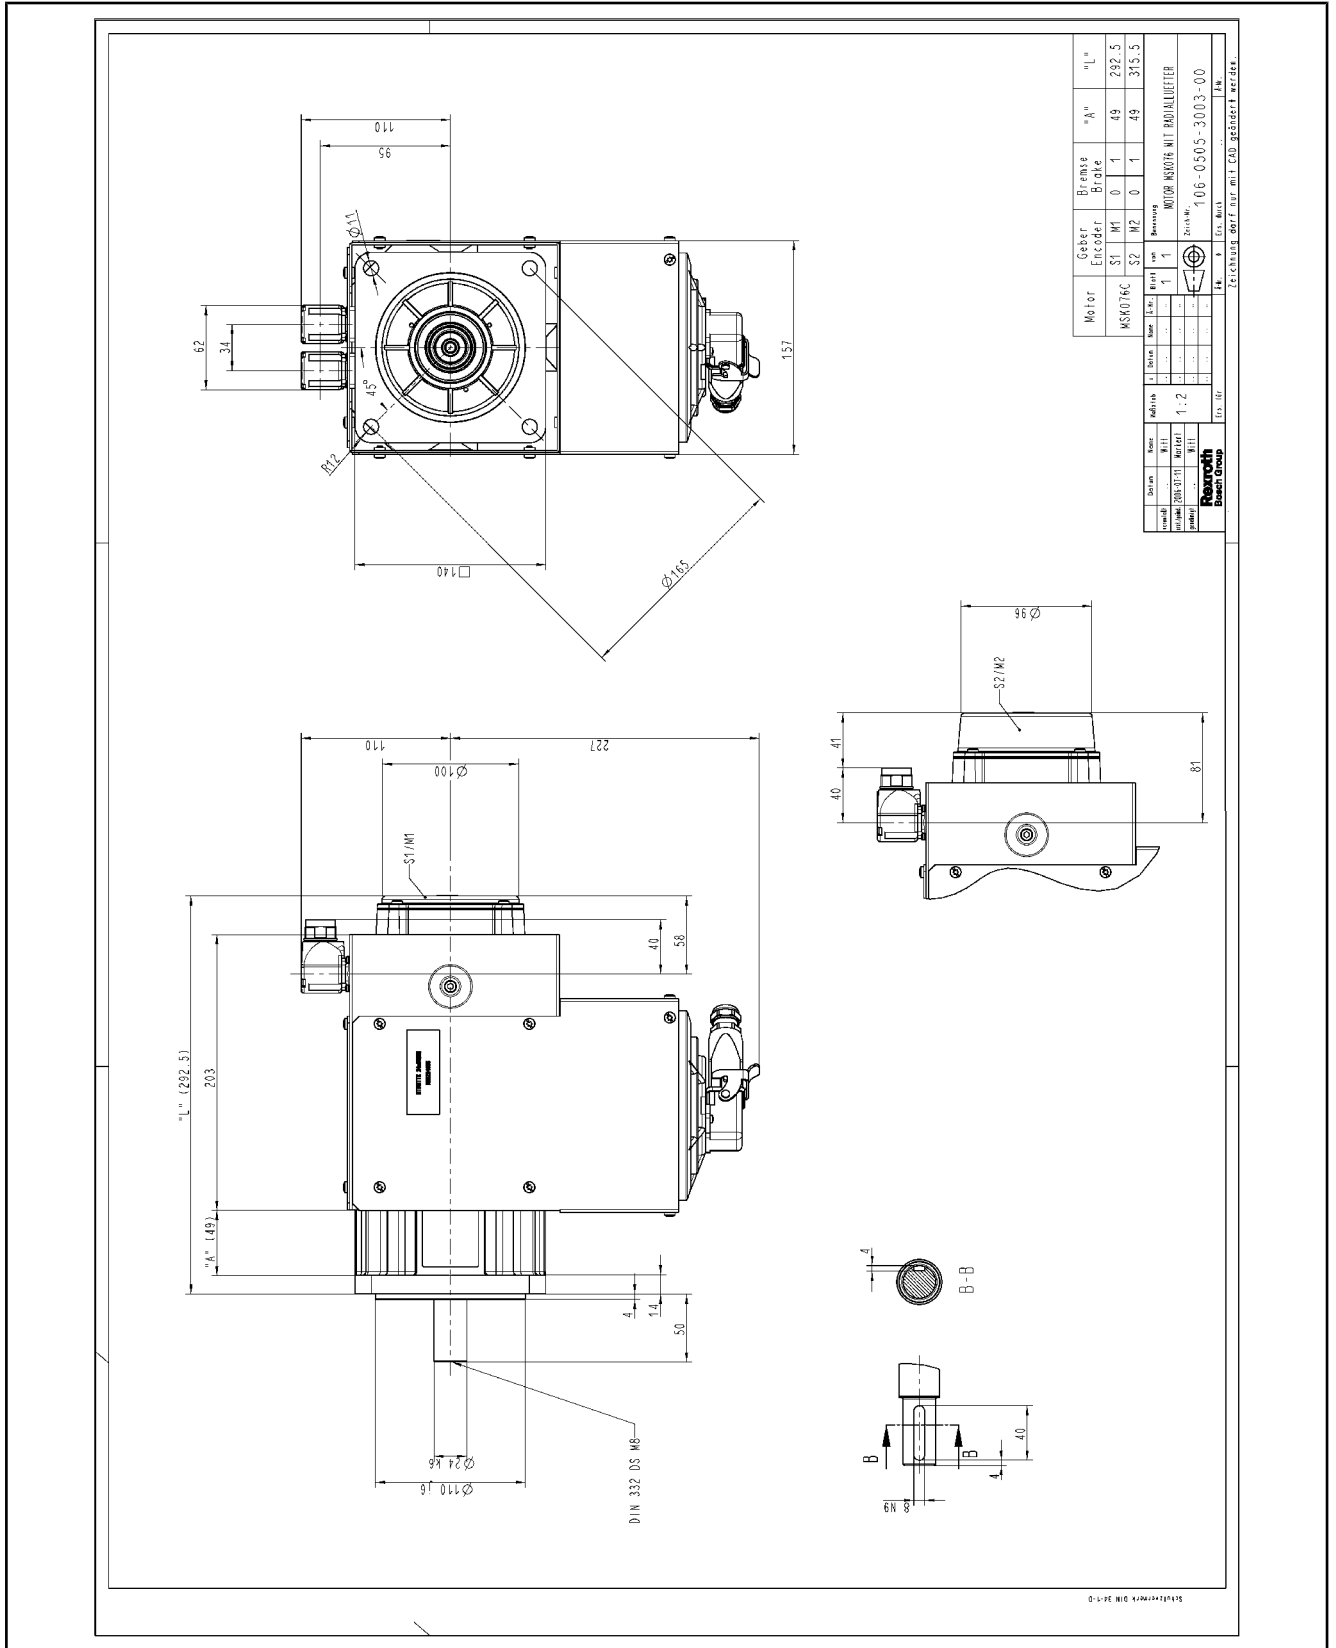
Dimension sheet MSK076 with radial fan unit
